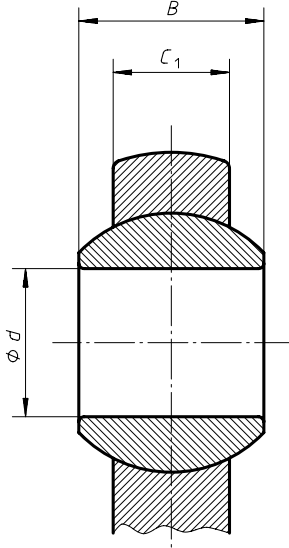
Spherical plain bearing rod end with inner ring only (integral design) ³⁾
